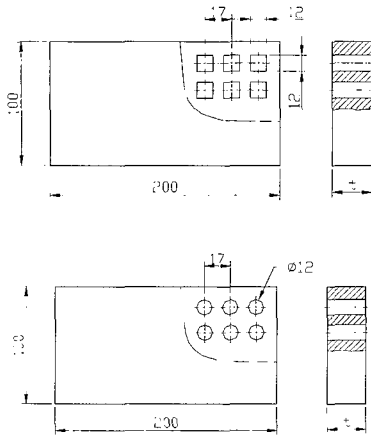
Detail view of specimen(t=10, 30, 50mm)
